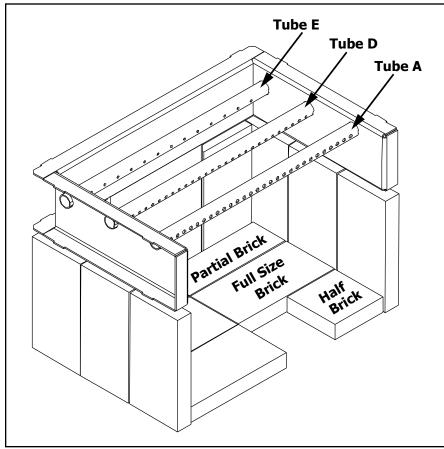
Brick Placement for 1200 shown with Secondary Air Channel and Tubes.
